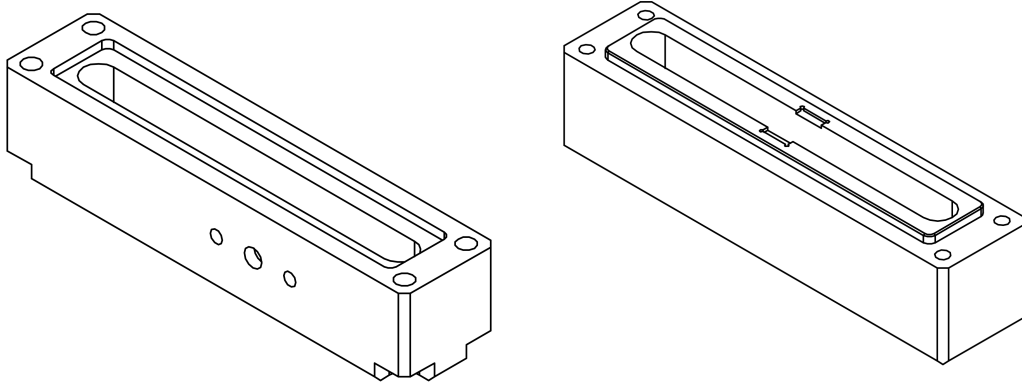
A wireframe sketch of the copper cavity designed in Autodesk Inventor [10]. On the lower part the coil is mounted into the cylindrical shaped inner space. The input and output ports are installed by screws at the threads.
